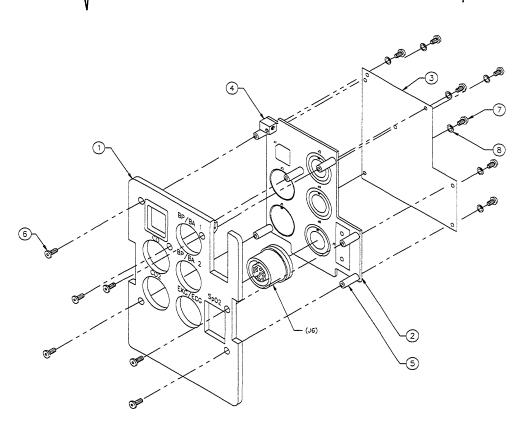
Hewlett-Packard Connector Plate Assembly
